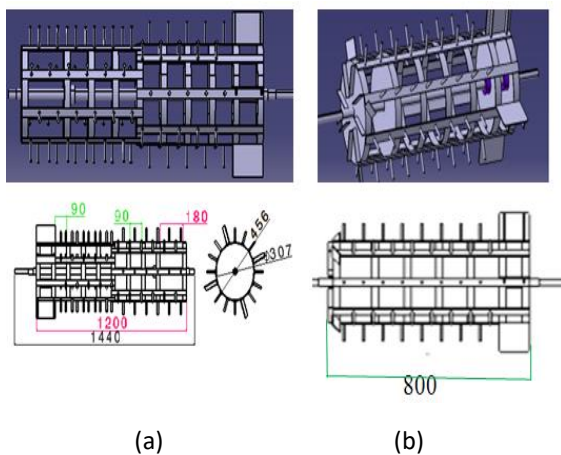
a) Modified drum part (all dimensions are in mm) b) The Existing Drum
